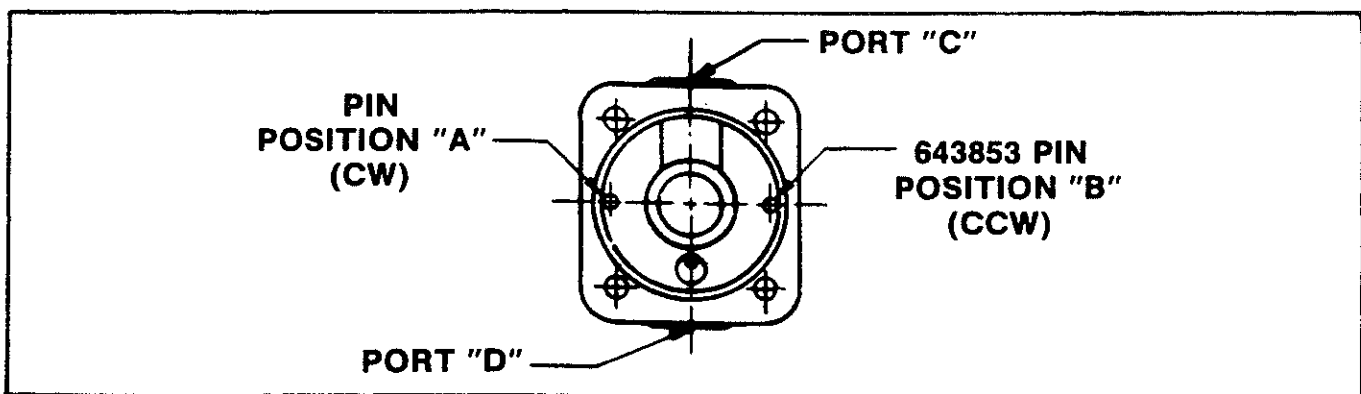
PIN LOCATION ON PUMP BODY ASSEMBLY.
